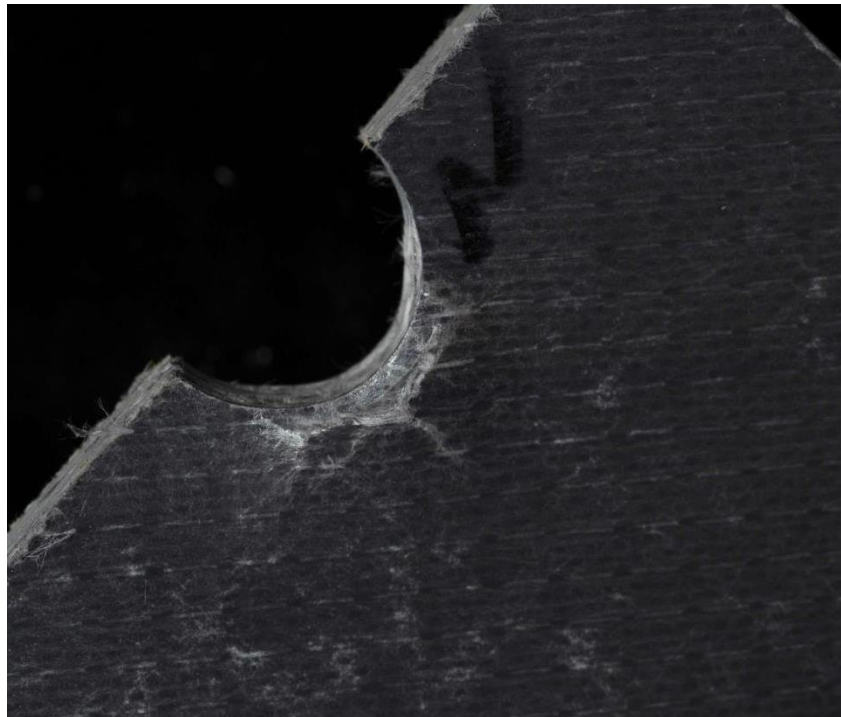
Typical Failure Face of Pin-bearing Specimen
